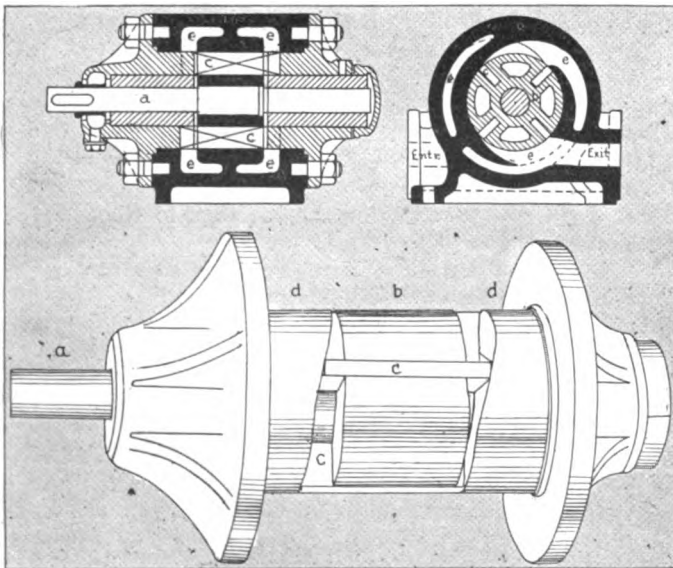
Sectional views of rotary pump for fire engines as designed by V. Pittler—with side view detail of the rotary piston and adjacent parts
